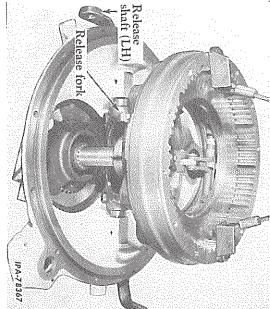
Removing the Drive Ring from the Clutch Housing
